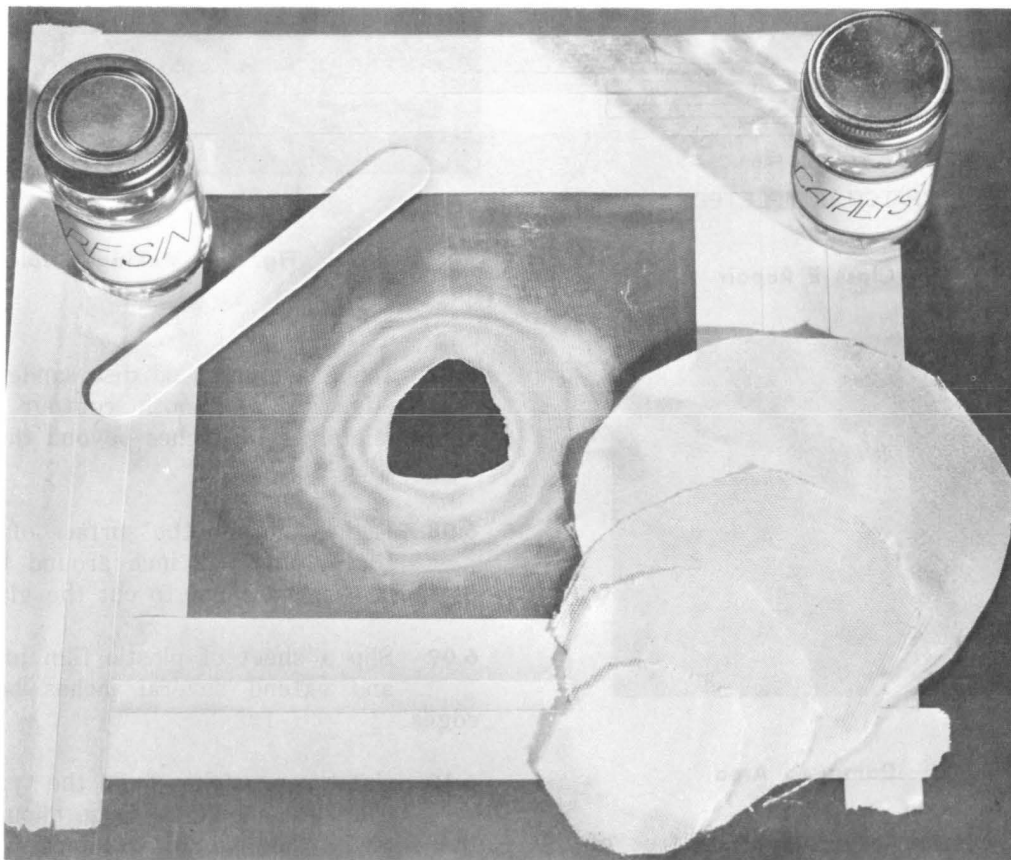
Feathered Hole Ready to Receive Filler Patches
